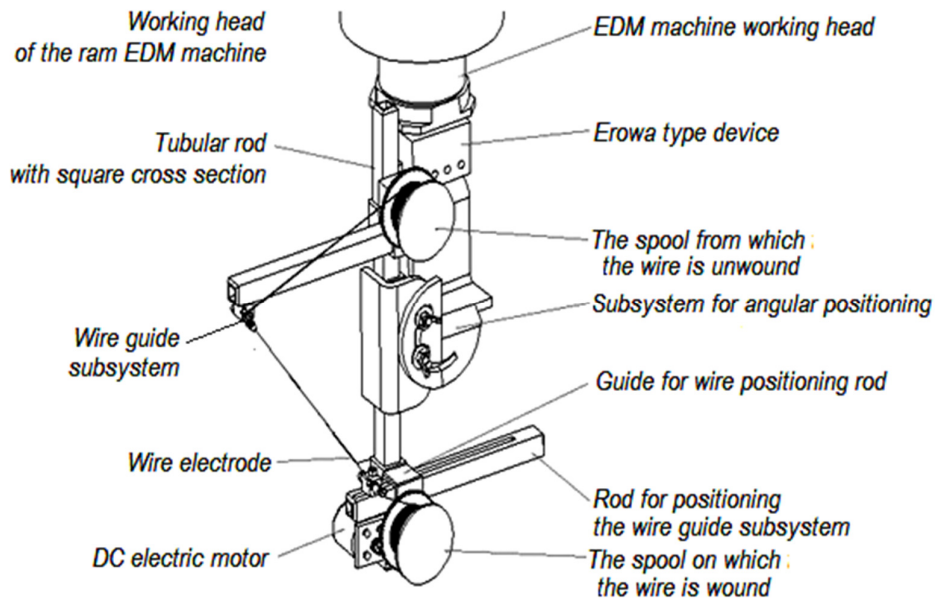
Variant identified for the WEDM device adaptable on ram EDM machine
